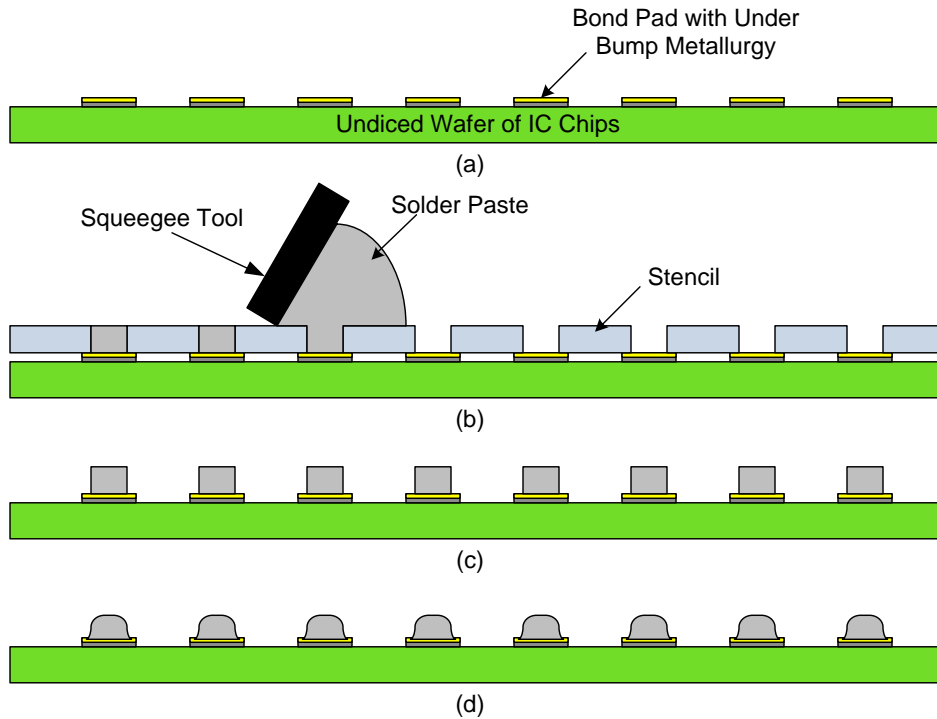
Cross section of a stencil solder deposition process. (a) Starting with a wafer with under bump metallurgy already on the wafer surface, (b) place stencil on surface and squeegee solder paste into the stencil openings. (c) Remove stencil and (d) reflow solder.
